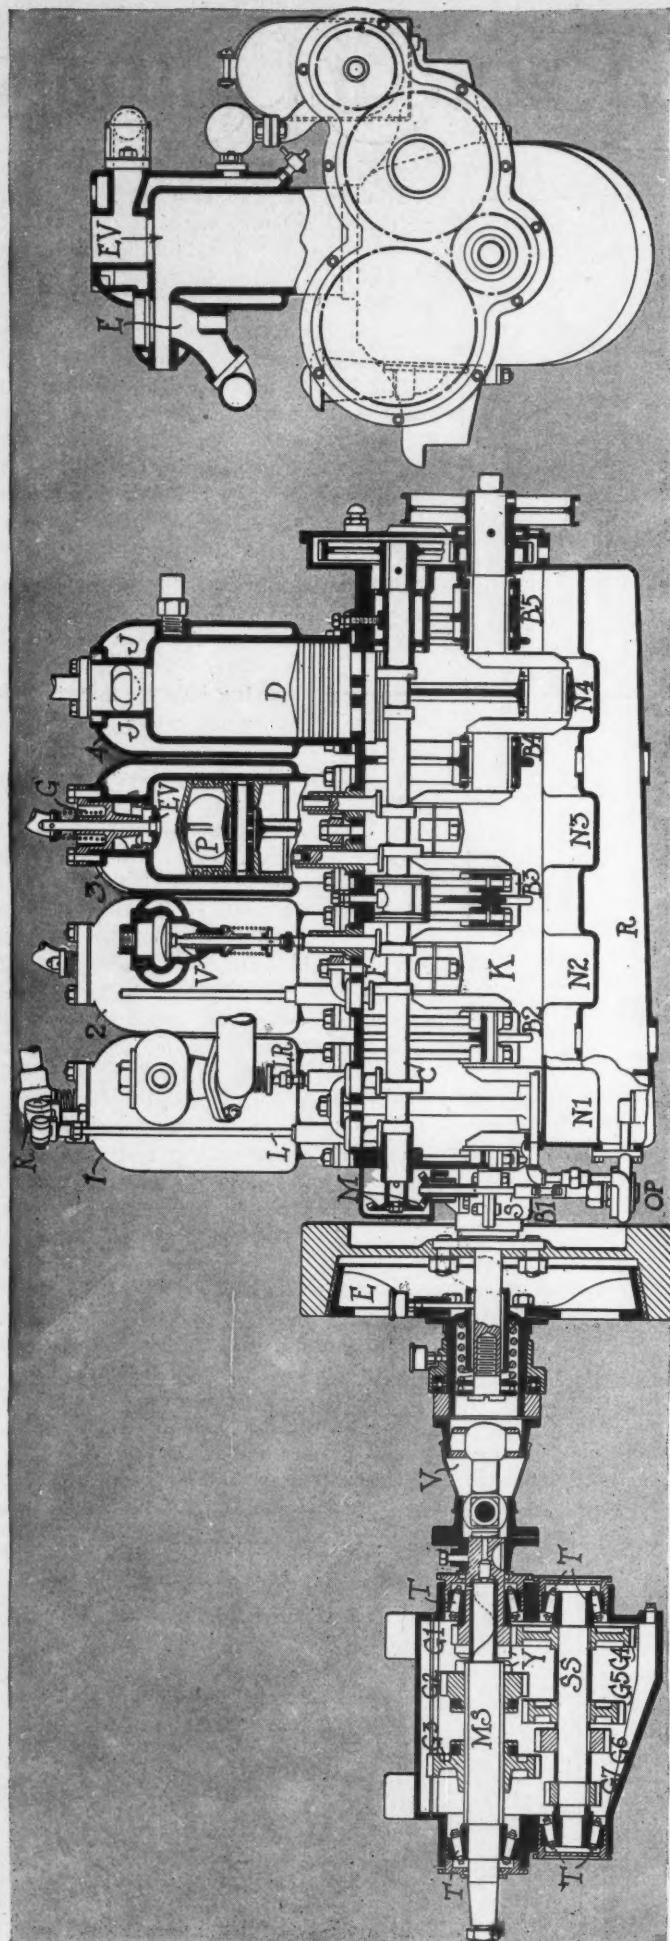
VERTICAL SECTION OF GREAT WESTERN GEARBOX, CLUTCH AND MOTOR FOR 1911 MARKET
